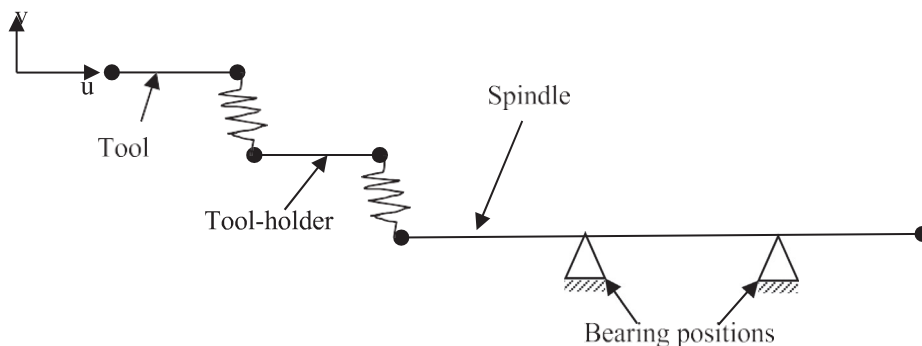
Line model of the spindle-tool unit with spring and bearing connections.
